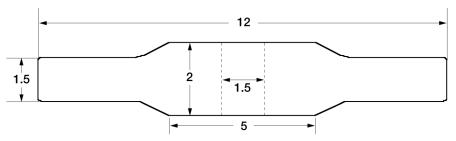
Machining plan for heat treat shape. All dimensions are in inches.
